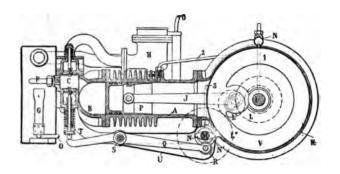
THE CLEMENT GASOLINE MOTOR.
